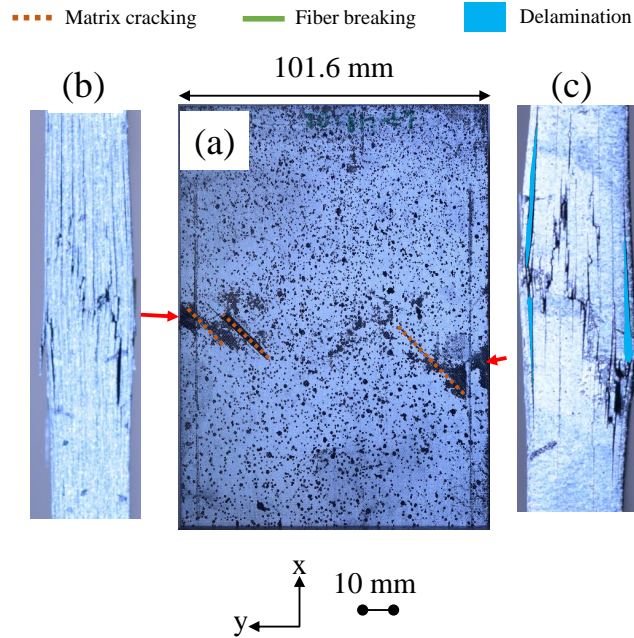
Surface inspections of the CAI-induced damage of an L1-S-48 sample: (a) non-impacted surface, (b) left side view, and (c) right side view.
